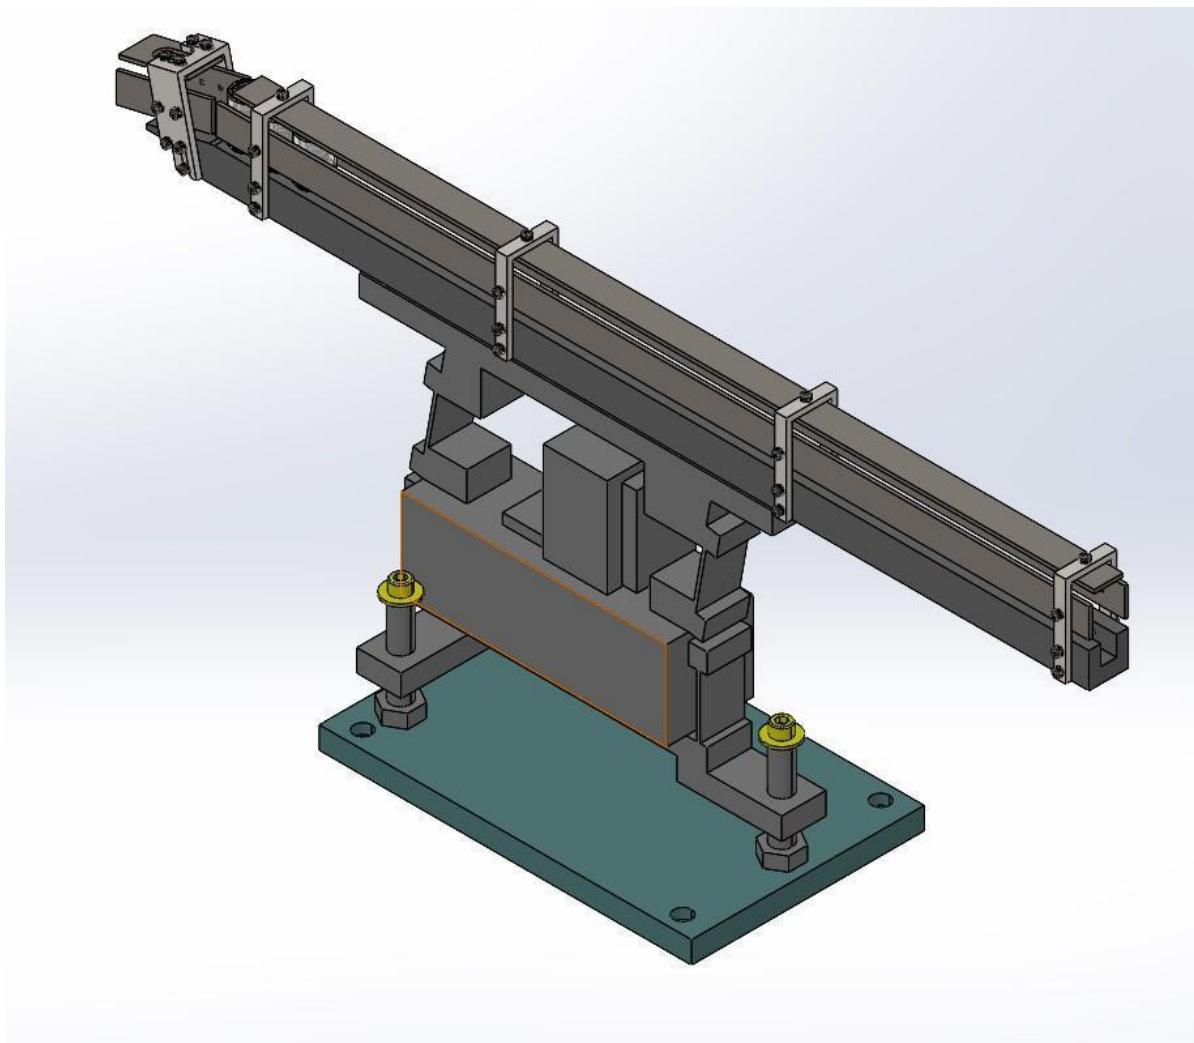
Sub Assembly Two - Vibrating Rail
